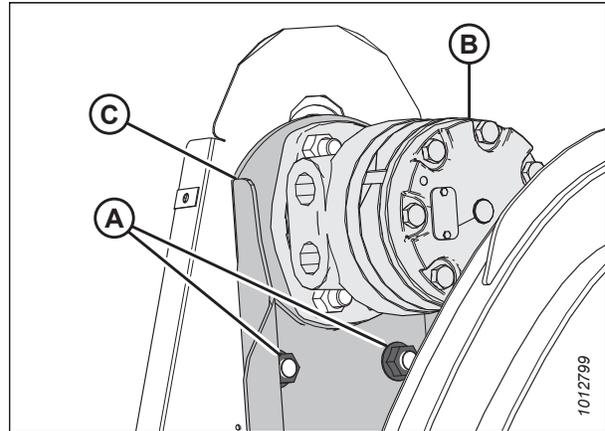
Single-Reel Drive Shown – Double-Reel Drive Similar
